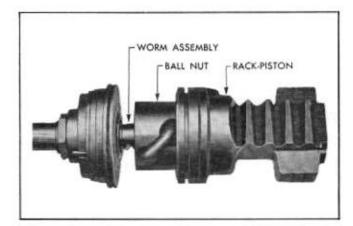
Ball Nut and Worm Assembly Removed from Rack-Piston
